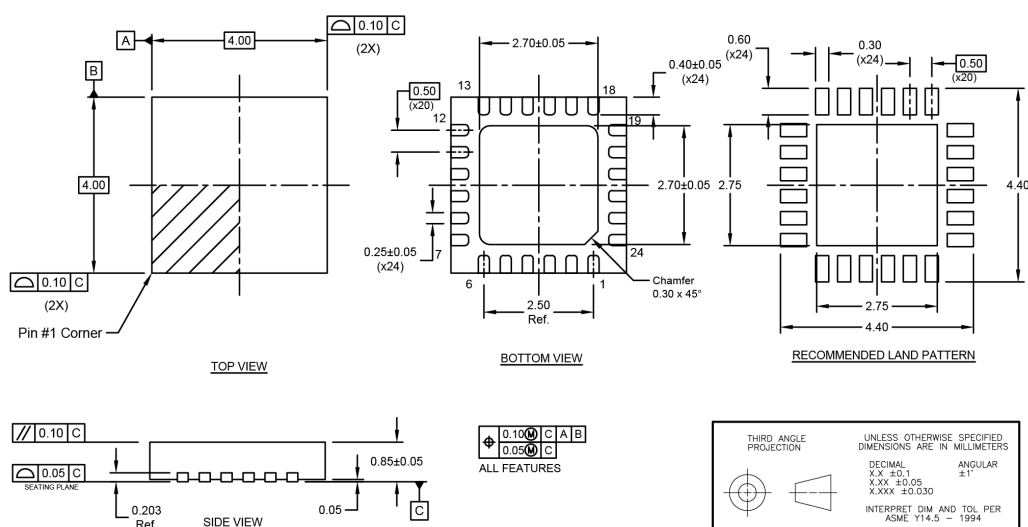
Package mechanical drawing for the 24-lead $4 \times 4 \times 0.85$ mm QFN package
